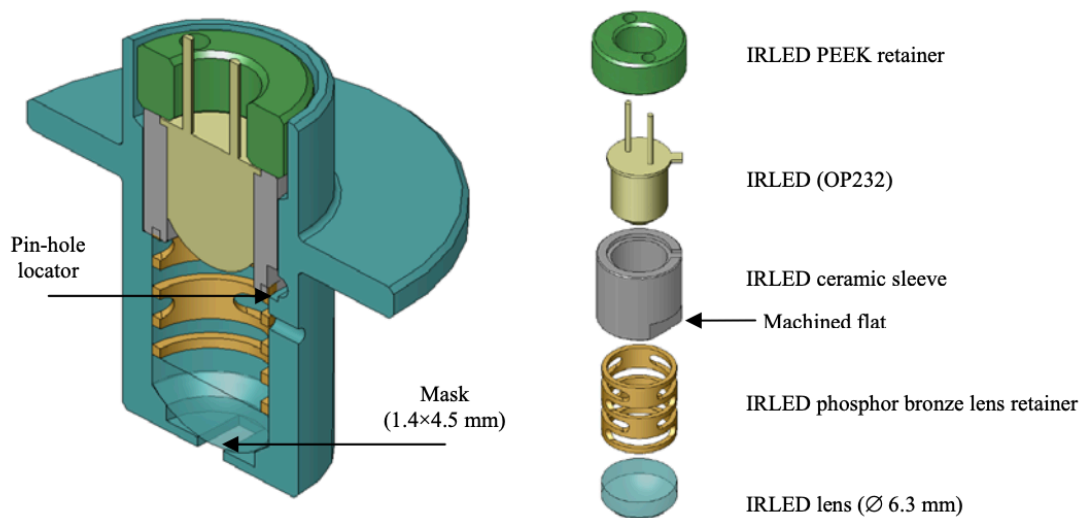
IRLED carrier assembly. Left: cross-sectional view of the IRLED carrier. Right: exploded view showing the constituent parts.
